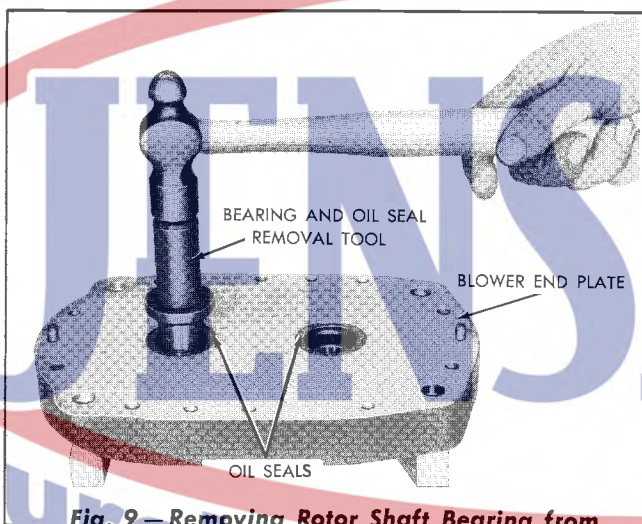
Removing Rotor Shaft Bearing from End Plate
